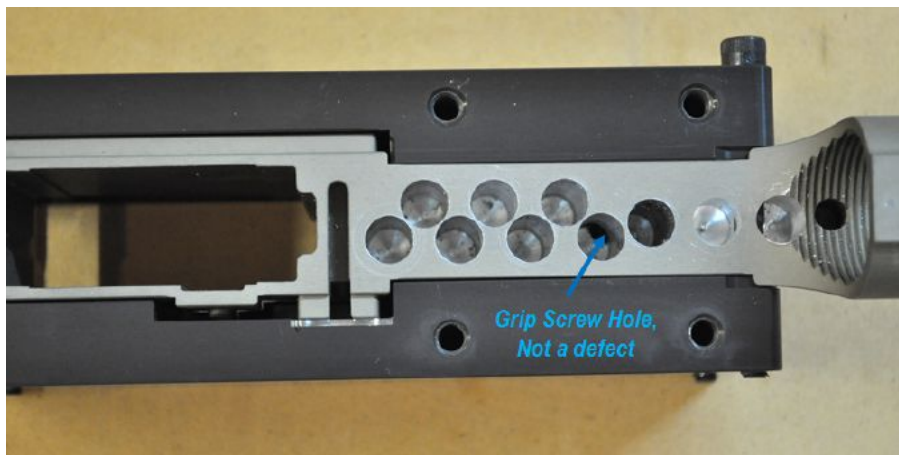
(right): lower with all roughing holes drilled and ready for the next step
